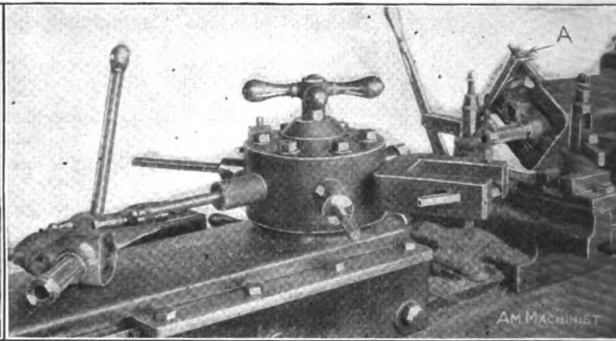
SECOND OPERATION ON GEAR HOUSINGS
